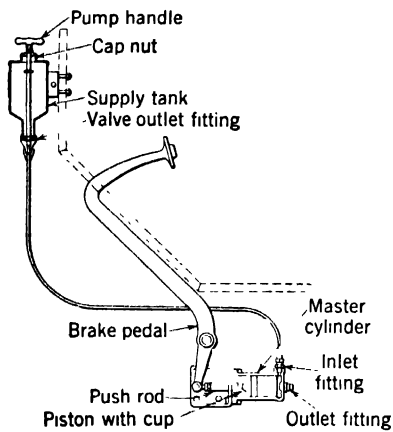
Hydraulic-brake Pedal and Supply-tank Assembly.
